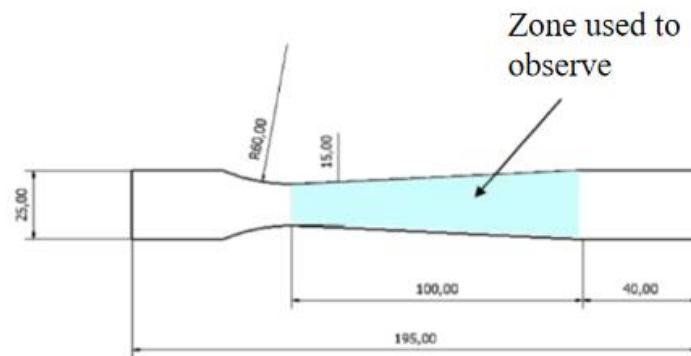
Shape and dimensions of coated tensile test specimen [67].
